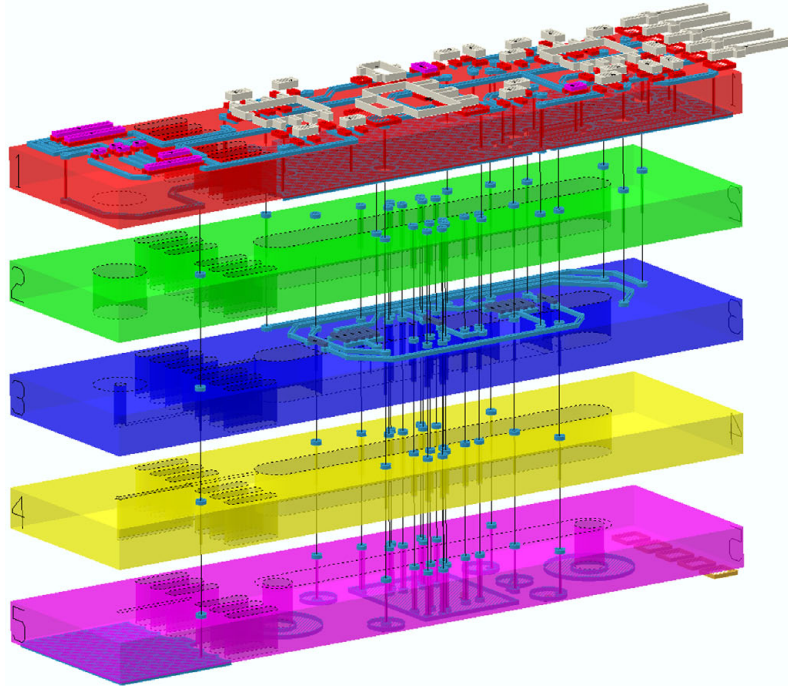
3D, semi-transparent exploded view of the integrated sensor, showing the five LTCC tapes.
